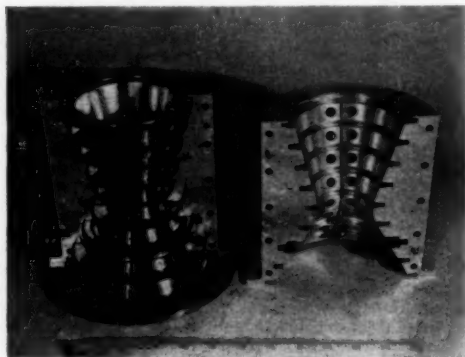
SECTIONALLY COOLED NOZZLE FOR INVESTIGATION OF HEAT TRANSFER IN ROCKET MOTORS
